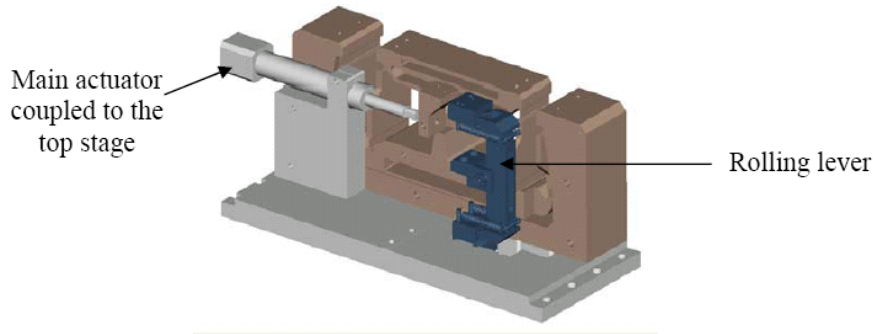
Mounting of the main actuator and the lever on the translation mechanics
